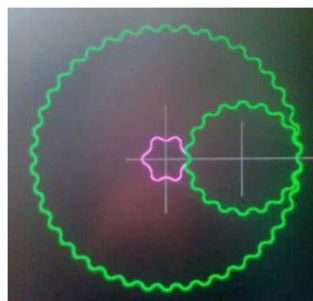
Planetary gearbox with cycloidal tooth profile (scheme 6-18-42)
